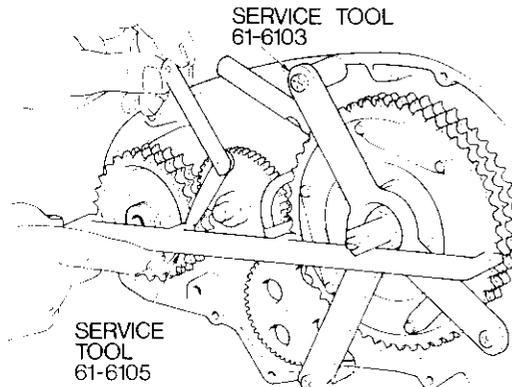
Location of Service Tool 61-6105. Measuring clearance between engine sprocket and gauge.
